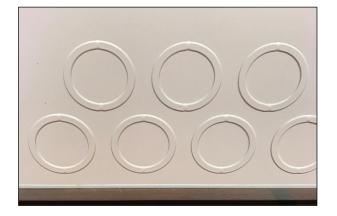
Unopax manifold cabinet with prefabricated pressed holes for bushings; type 2 double ring
